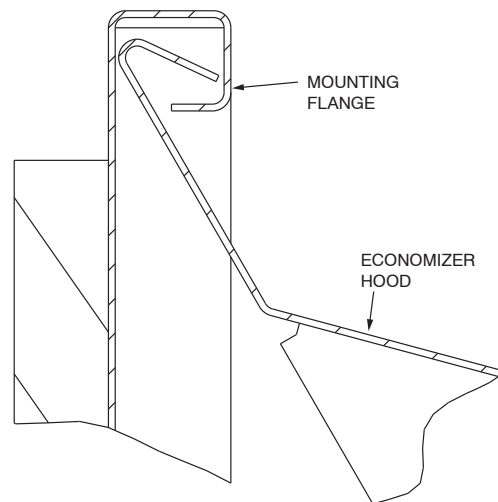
Barometric Relief/Power Exhaust Hood Flange
